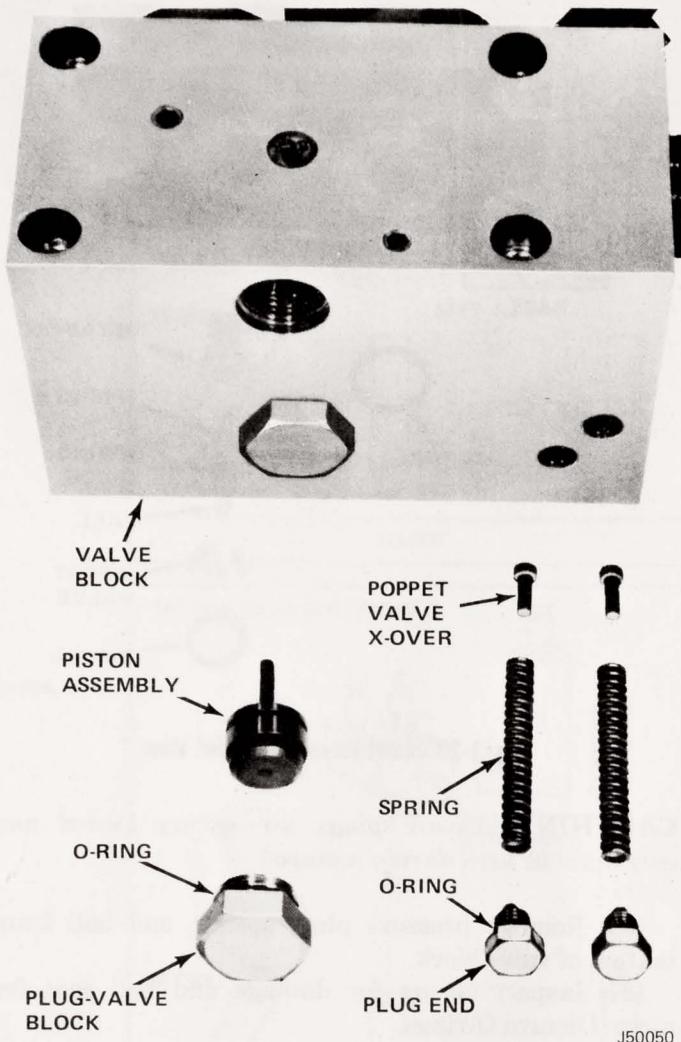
Piston Assembly and Poppet Valves—Exploded View
